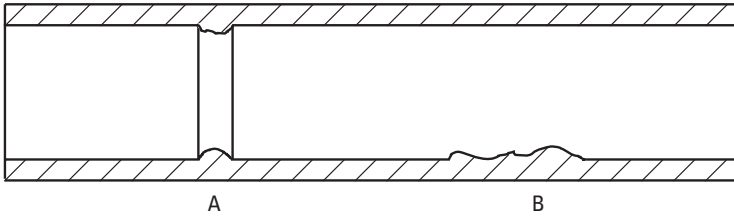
A cut showing some possible constructional faults of a waveguide section. At A, a welding joint is intruding far inside the rectangular tube and B has, for example, a corrosion-induced impairment of the surface finish.
